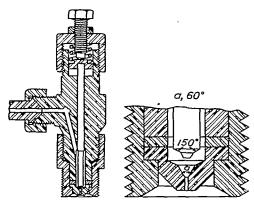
Sketch of automatic injection valve, and enlarged view of nozzle assembled in valve
